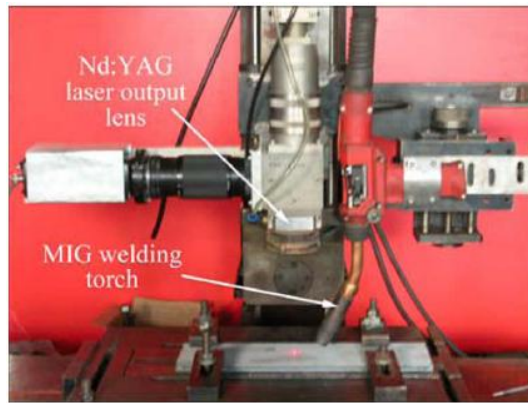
Nd:YAG laser + MIG arc hybrid welding head for lap joint LWB [22]
